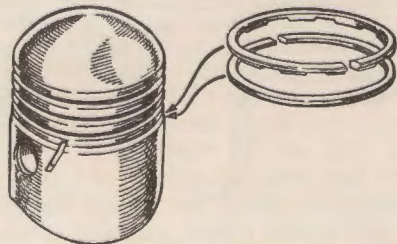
Piston for later "Constellation" and "Super Meteor." Showing the correct relative positions of the two scraper rings which fit in the bottom piston ring groove.
